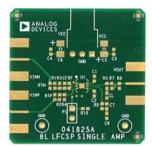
8L LFCSP SINGLE AMP Evaluation Board, Primary Side
